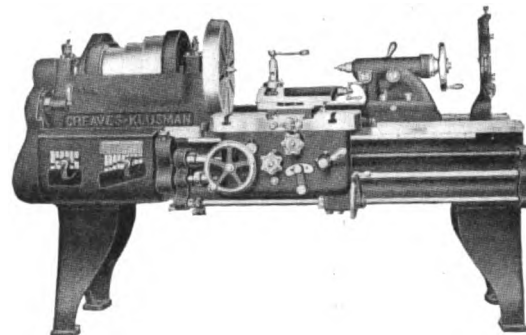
16-Inch Heavy, Quick-Change-Gear, Type Lathe
